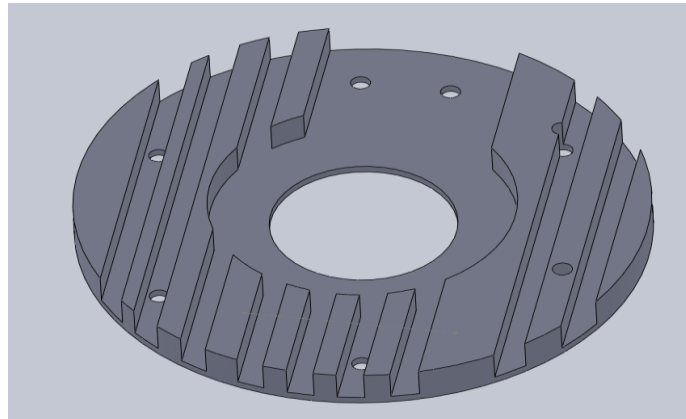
Solidworks drawing of the heat sink (a base plate for LED circuit board)
